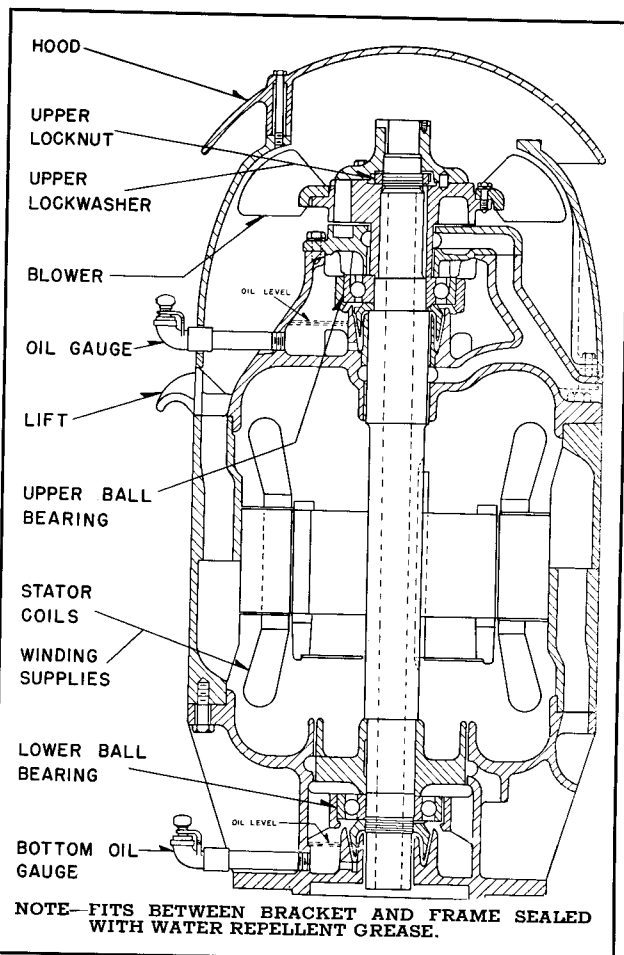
Motor A.C. Frames 364 to 405—Hollow or Solid Shaft Fan-Cooled or Explosion-Proof
